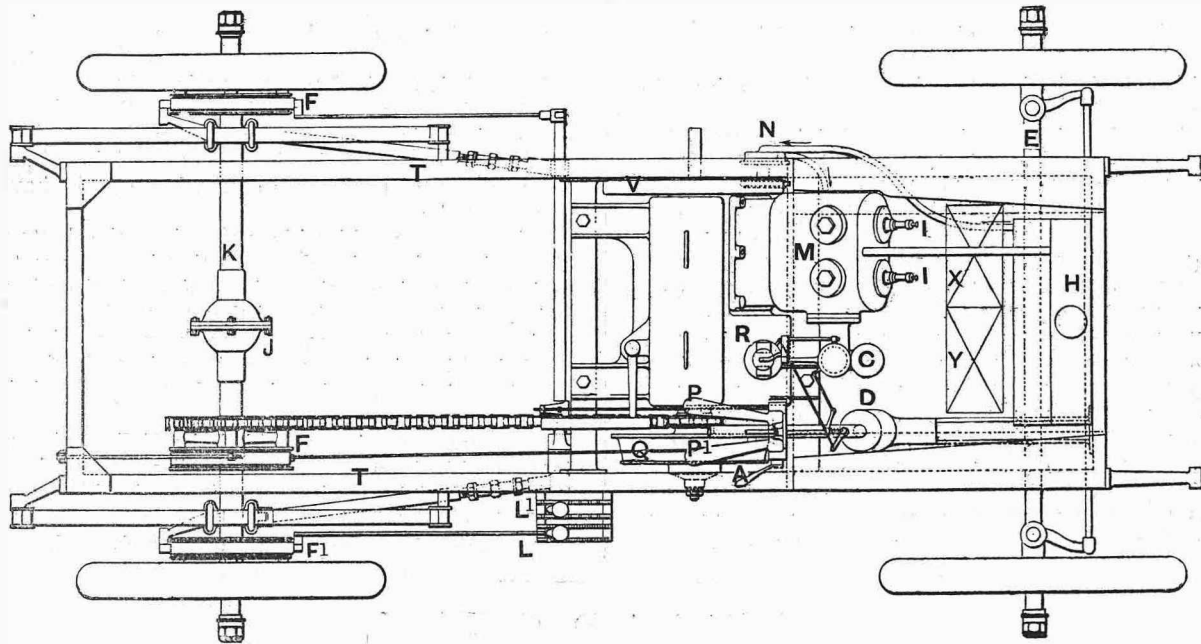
Plan of the Motobloc car, showing the disposition of the engine and gearing.
